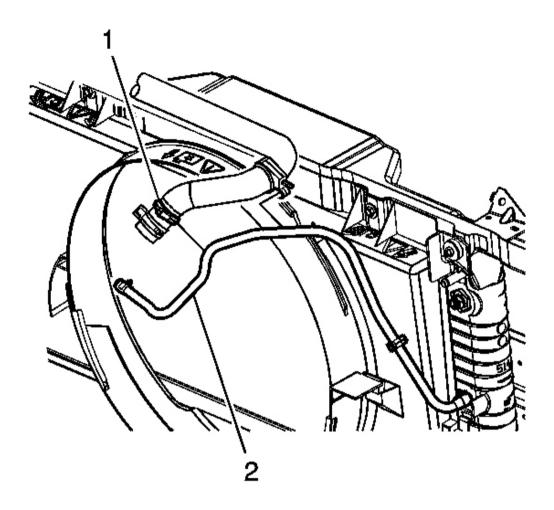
Radiator Vent Inlet Hose Courtesy of GENERAL MOTORS CORP.
